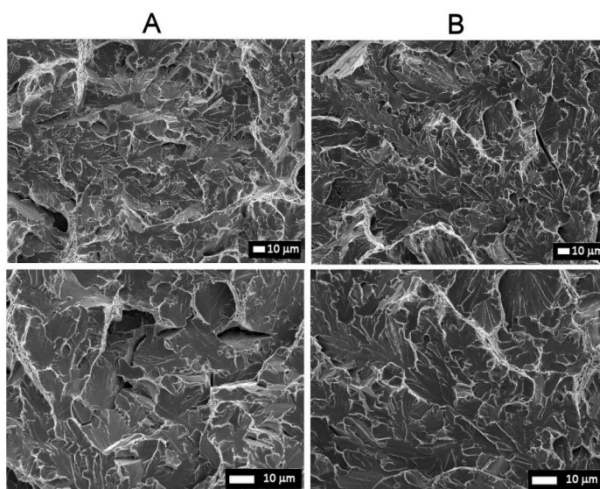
Morphology of fracture surfaces of non-modified cast steel A and modified cast steel B. Test temperature: - 40°C
